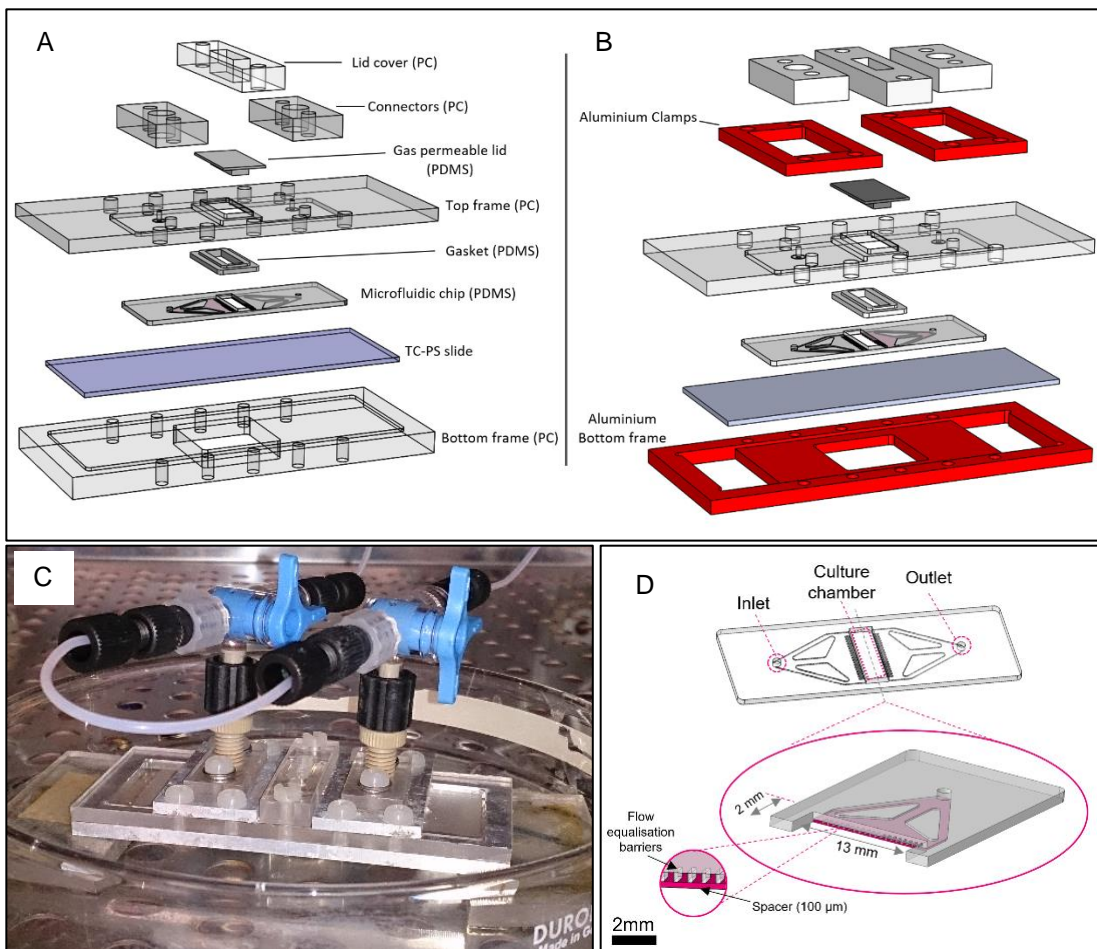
Exploded and Assembled View of the Microfluidic Culture Device and Chip.
